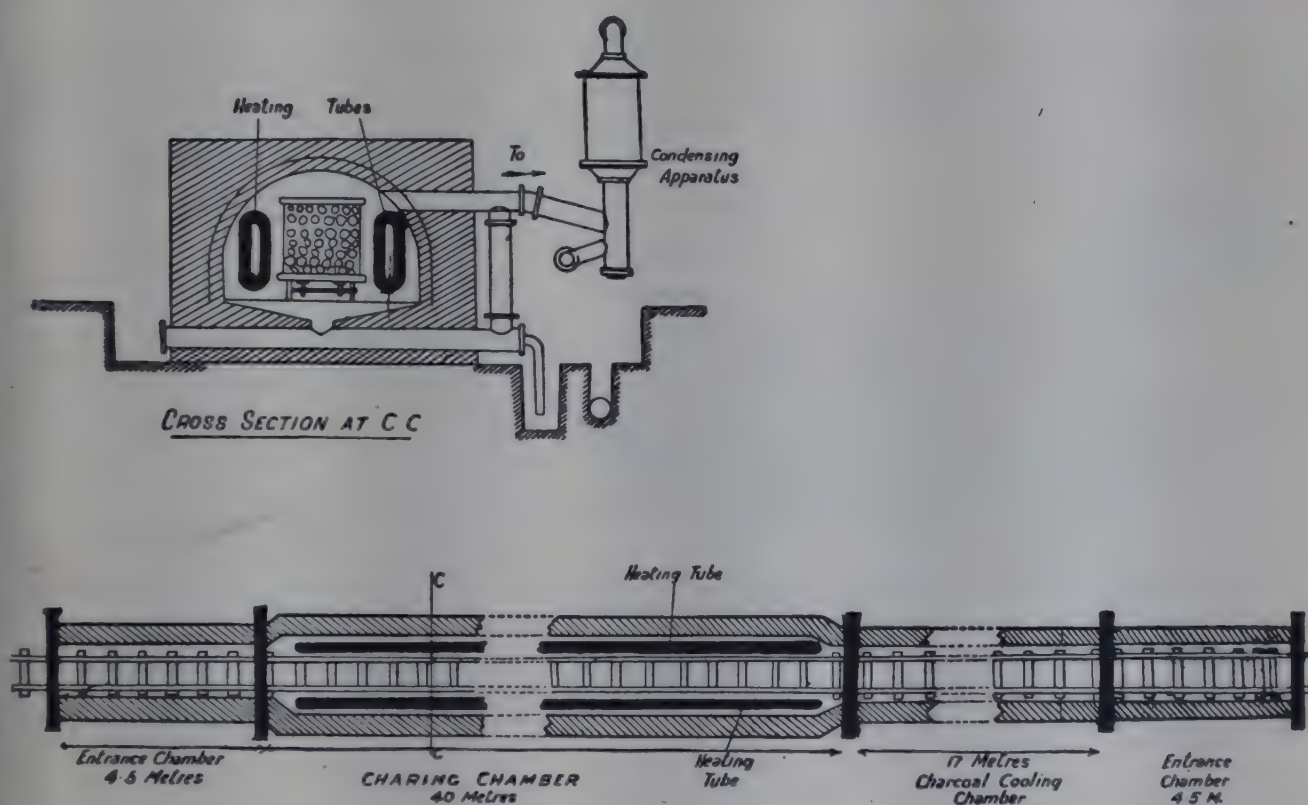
Gröndal's Tunnel Kiln for Charring Wood.
